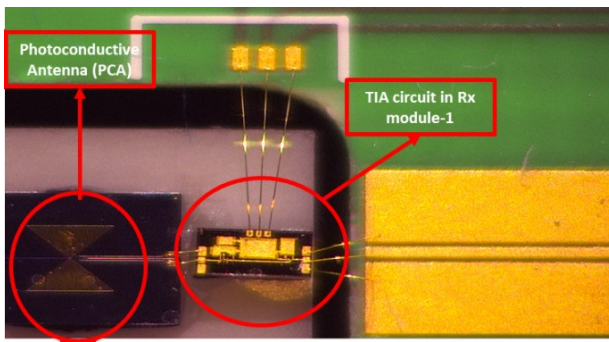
TIA connected to the assembly PCB zoomed into the red box of Fig. 9
